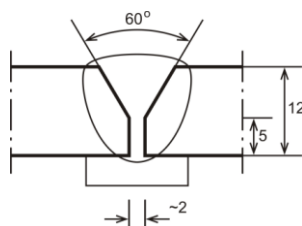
Scheme of the butt welded joint of flat bars with welding groove
